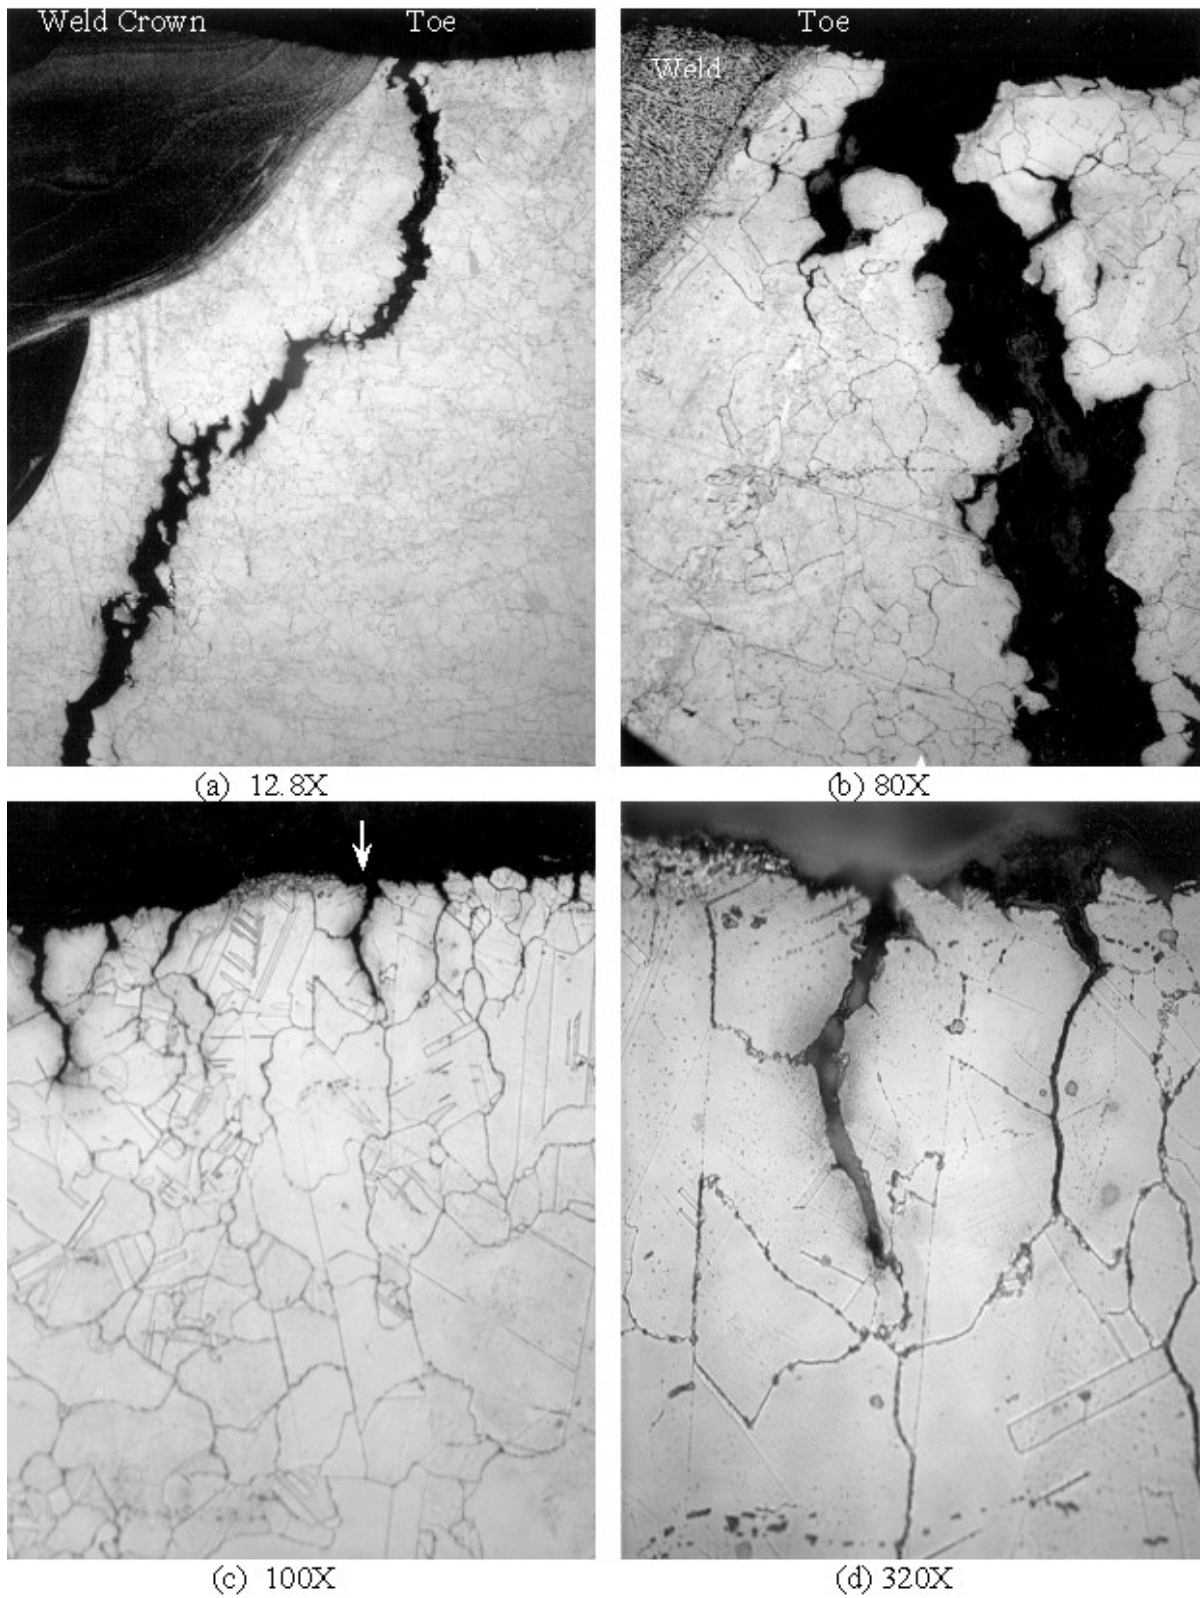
Photomicrographs of the weldment area shown in Figure 3-52-3.
